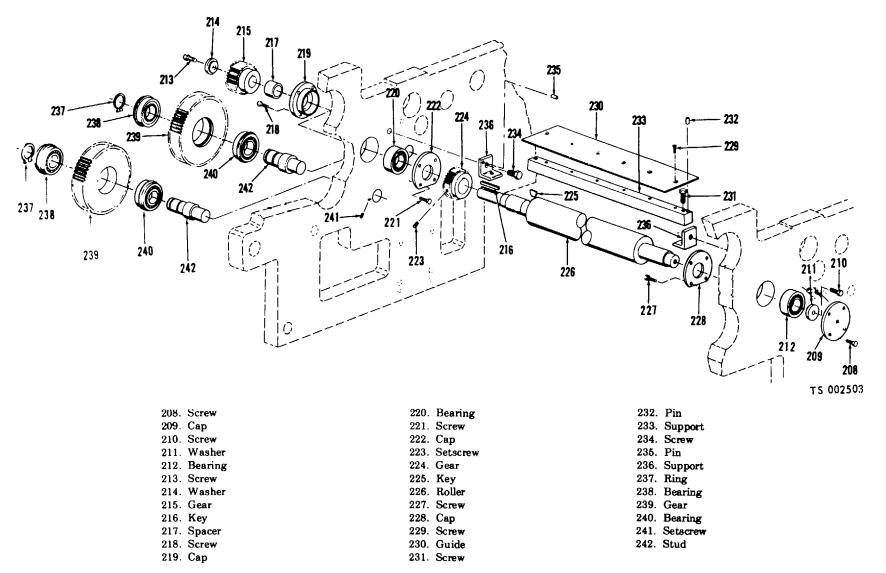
Trolley, paper guide and nipping roller alignment assembly (Sheet 7 of 7). 4-102
